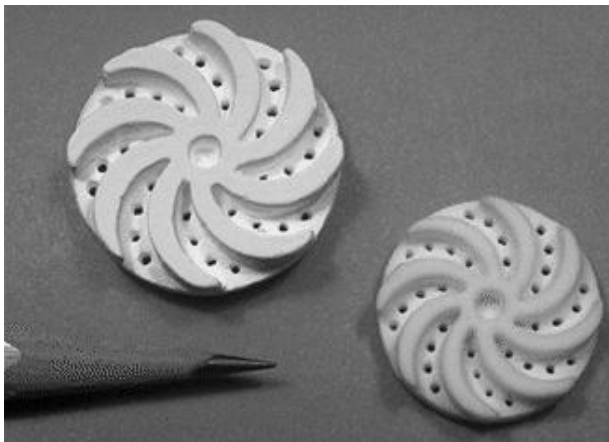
Structural Alumina part produced by 3D printing, before and after sintering.
